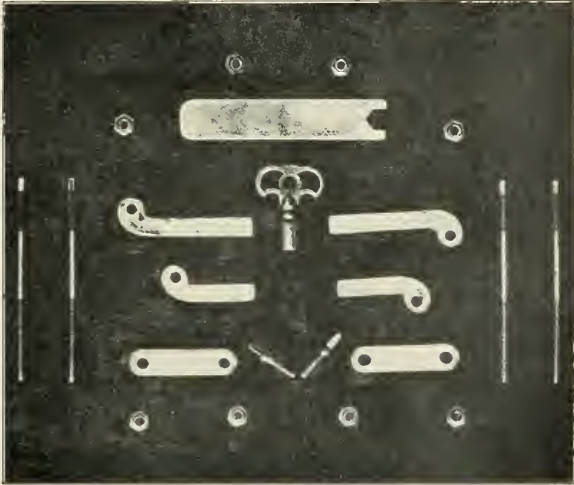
Separate Pieces of the Clamp. (Parkhill.)
